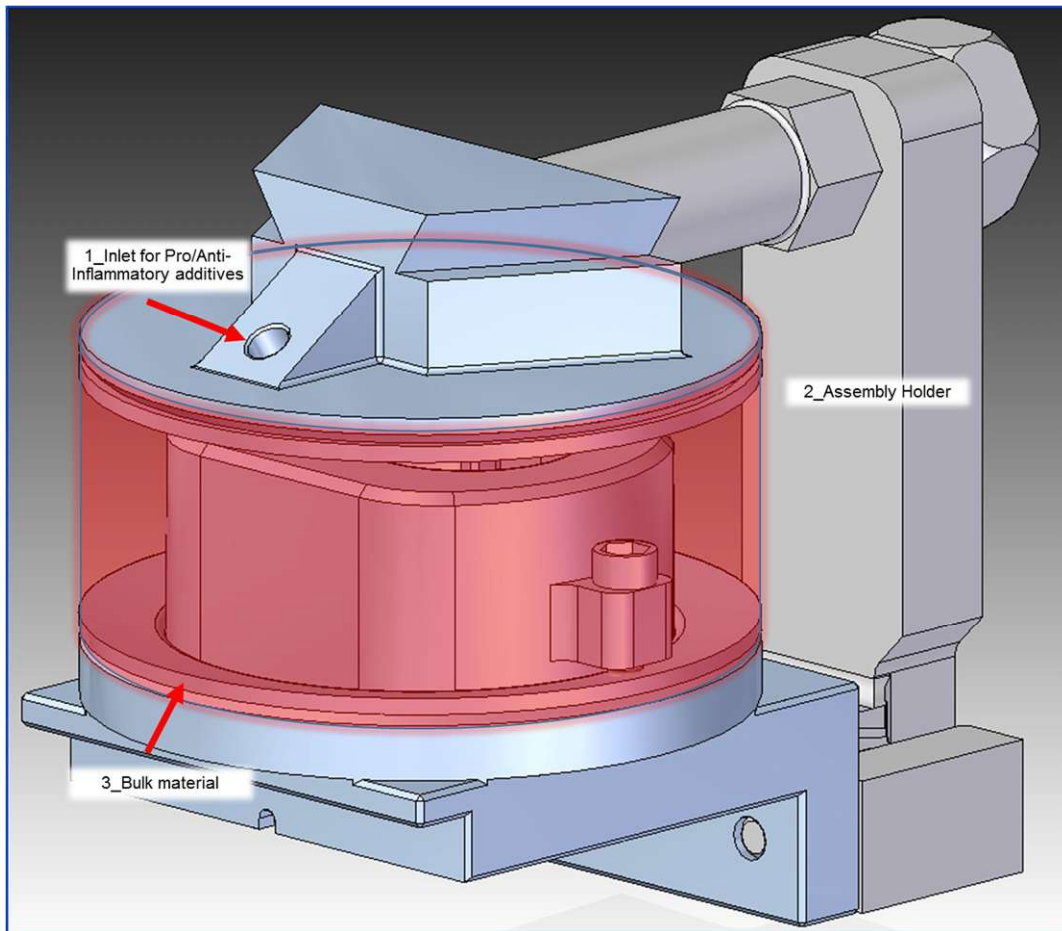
Schematic view of the complete assembly of the tribosystems.
